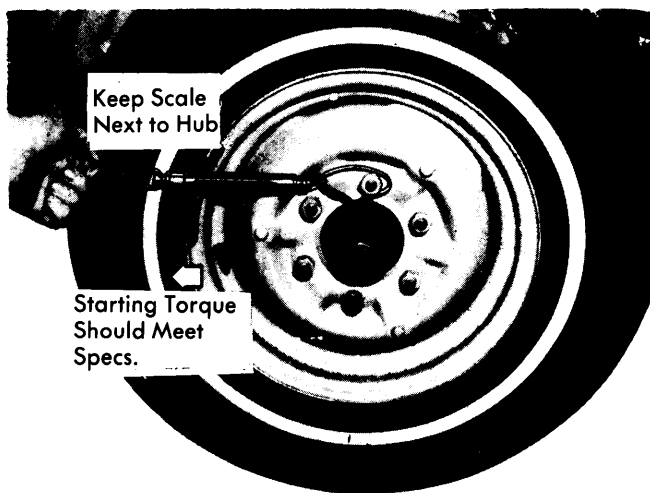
Using a Pull Scale to Measure Wheel Bearing Starting Torque
